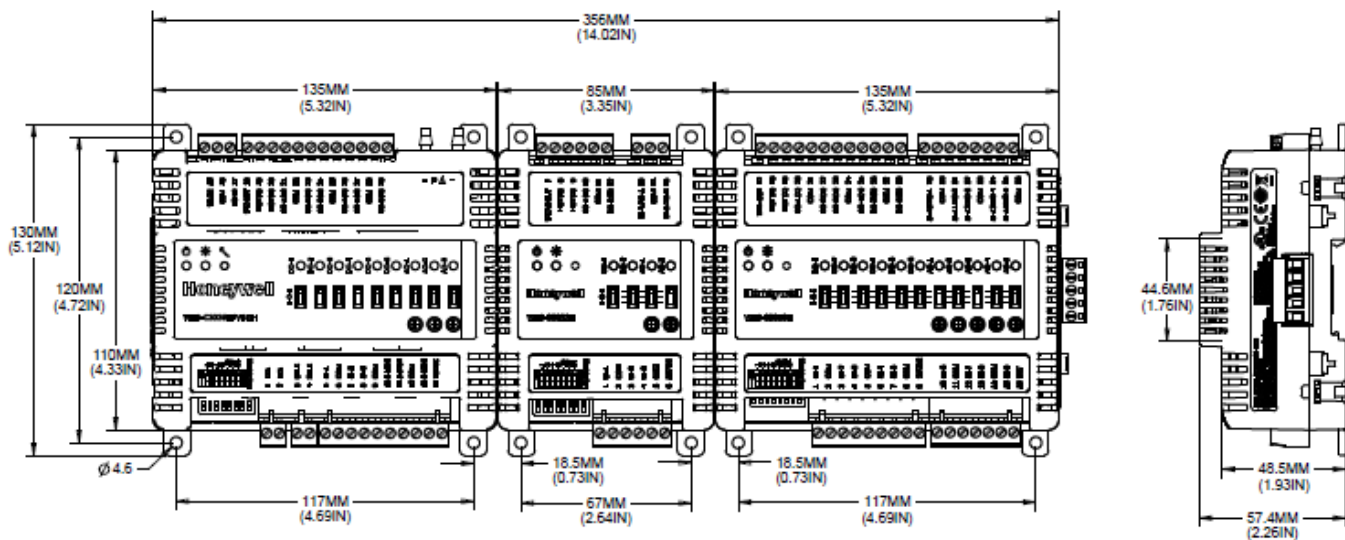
Panel mounting - controller dimensions in mm (inches)
